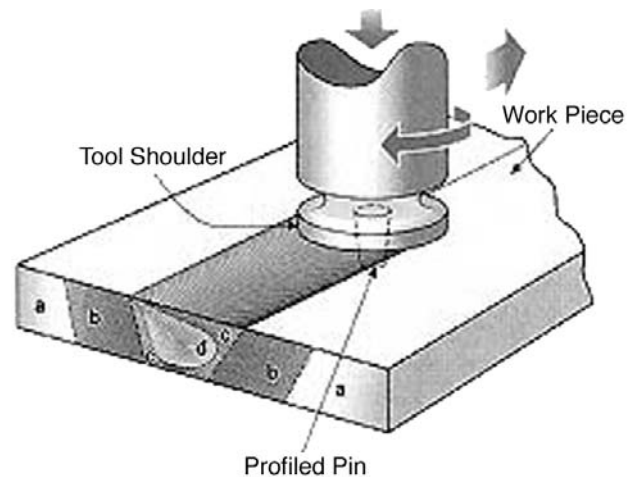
Friction stir joining and processing are accomplished by plunging a spinning tool into a material and translating the tool across the surface to form either a joint or a surface processed region (TWI, Ltd.).
